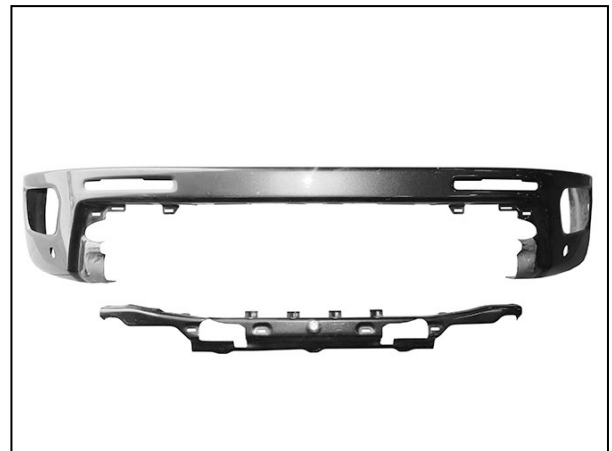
Remove center bumper support and ACC sensor if equipped from factory bumper
